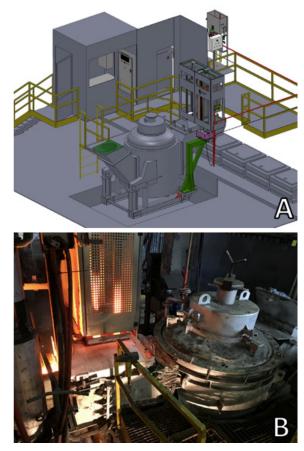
CAD representation (A) and photograph showing the positioning of the *heater* inside the casting zone and close to the presspour.
